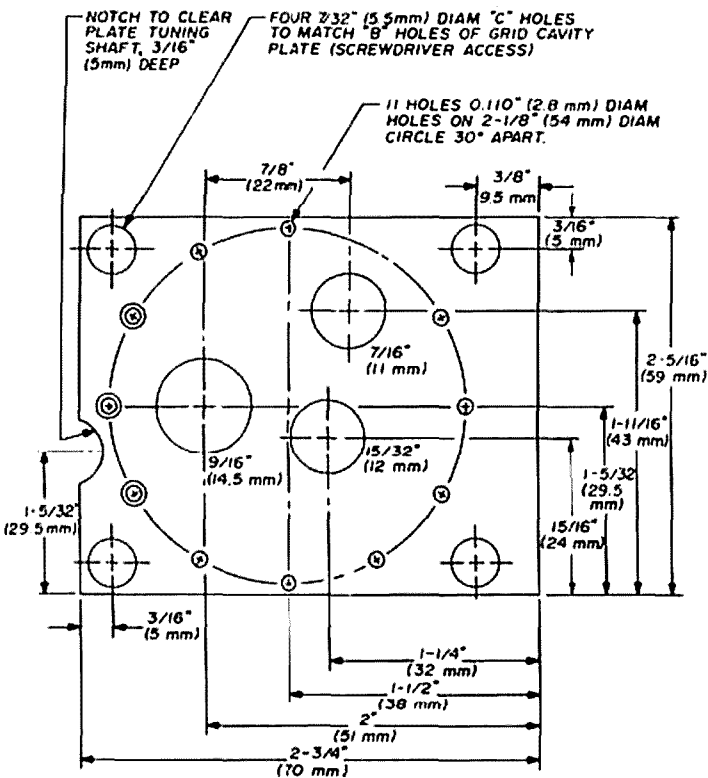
Cathode partition. Holes marked with the letter C are screwdriver clearance holes to facilitate assembly. Material is 0.093" (2.5mm) brass.
